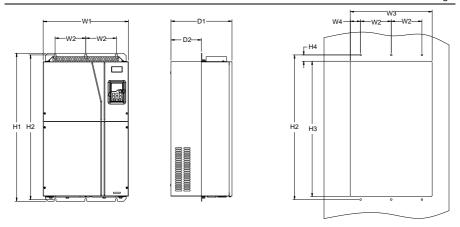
Flange mounting for 660V 160–220kW VFD models
